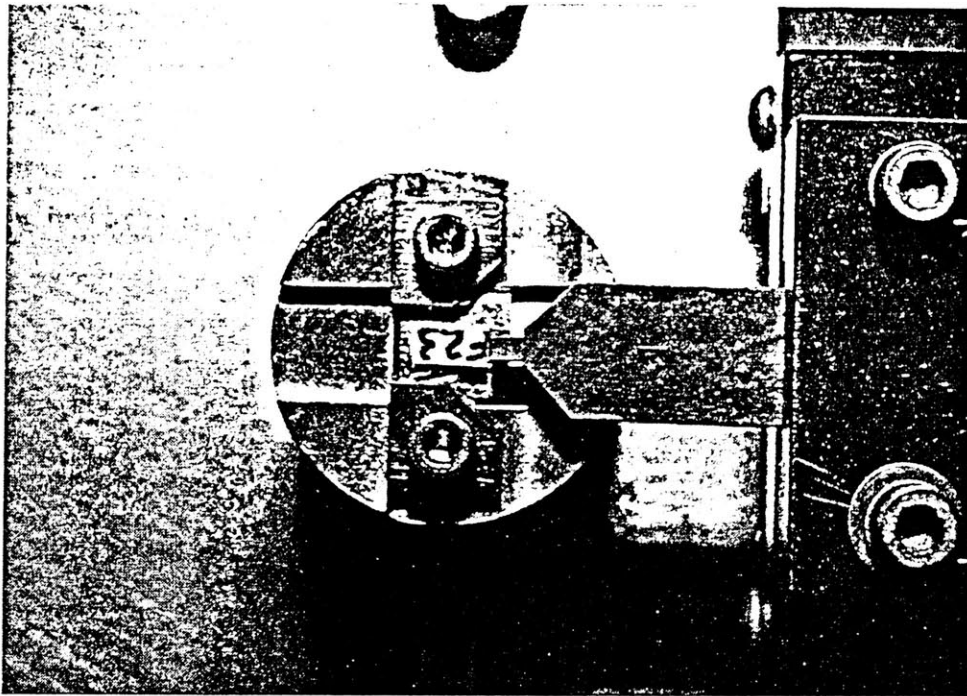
Close-up photograph of a shear sample in the shear test fixture. [3]
